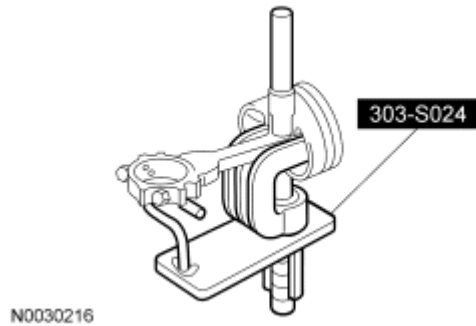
Pressing Piston Pin From Connecting Rod Using Special Tool (303--S024)
